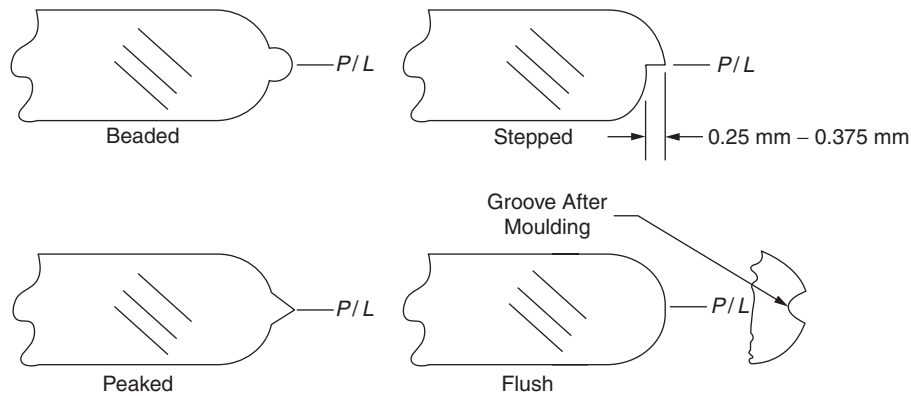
Parting line of moulding and parting surface of mould.
